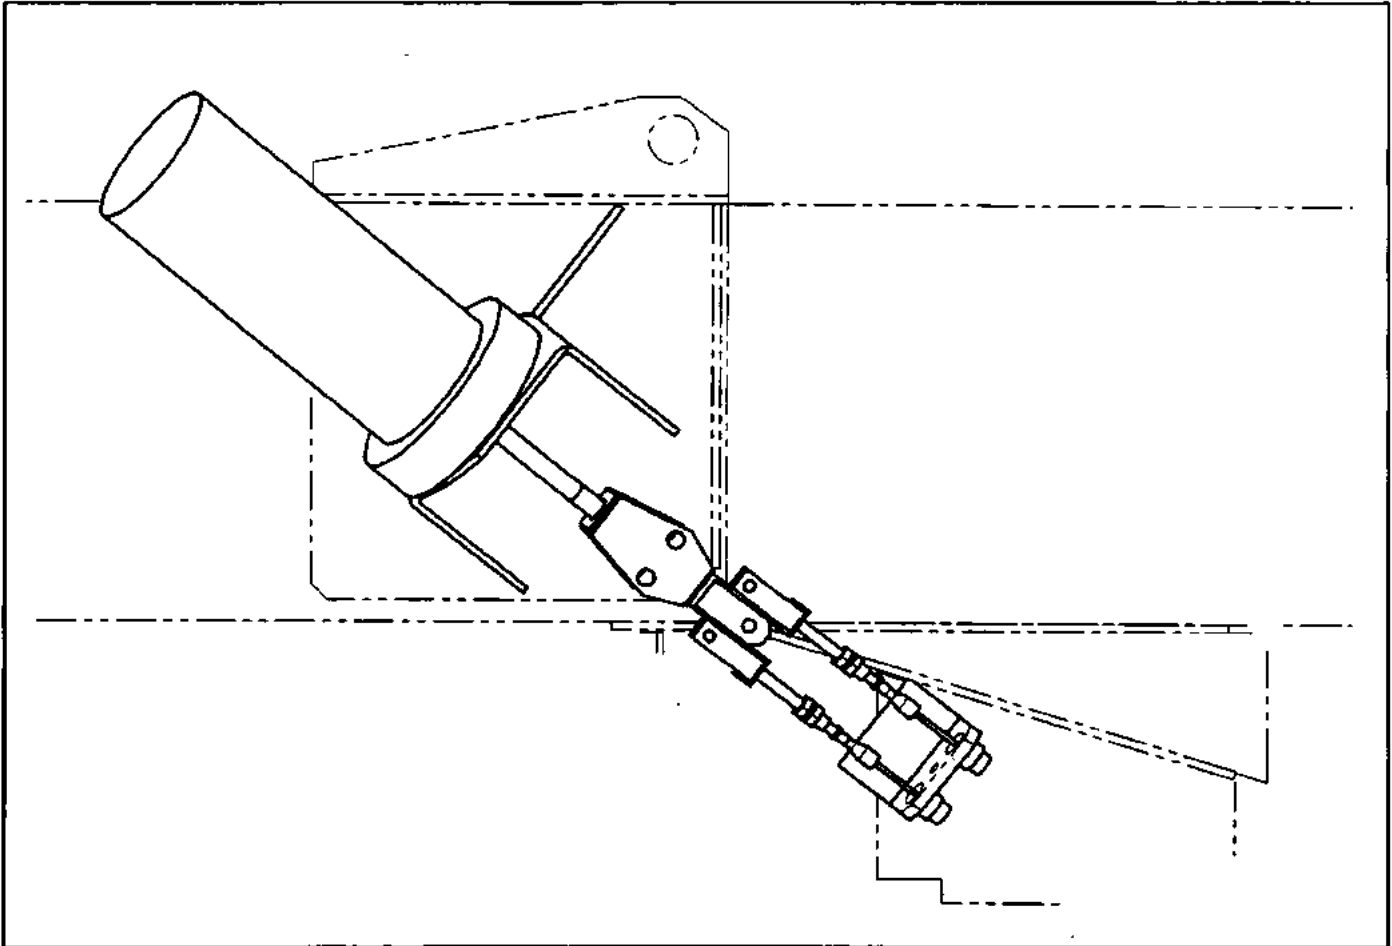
Disengage parking brake by mechanically screwing turnbuckle counterclockwise (relative to brake canister) until spring is compressed. Screw turnbuckle clockwise to engage parking brake.
